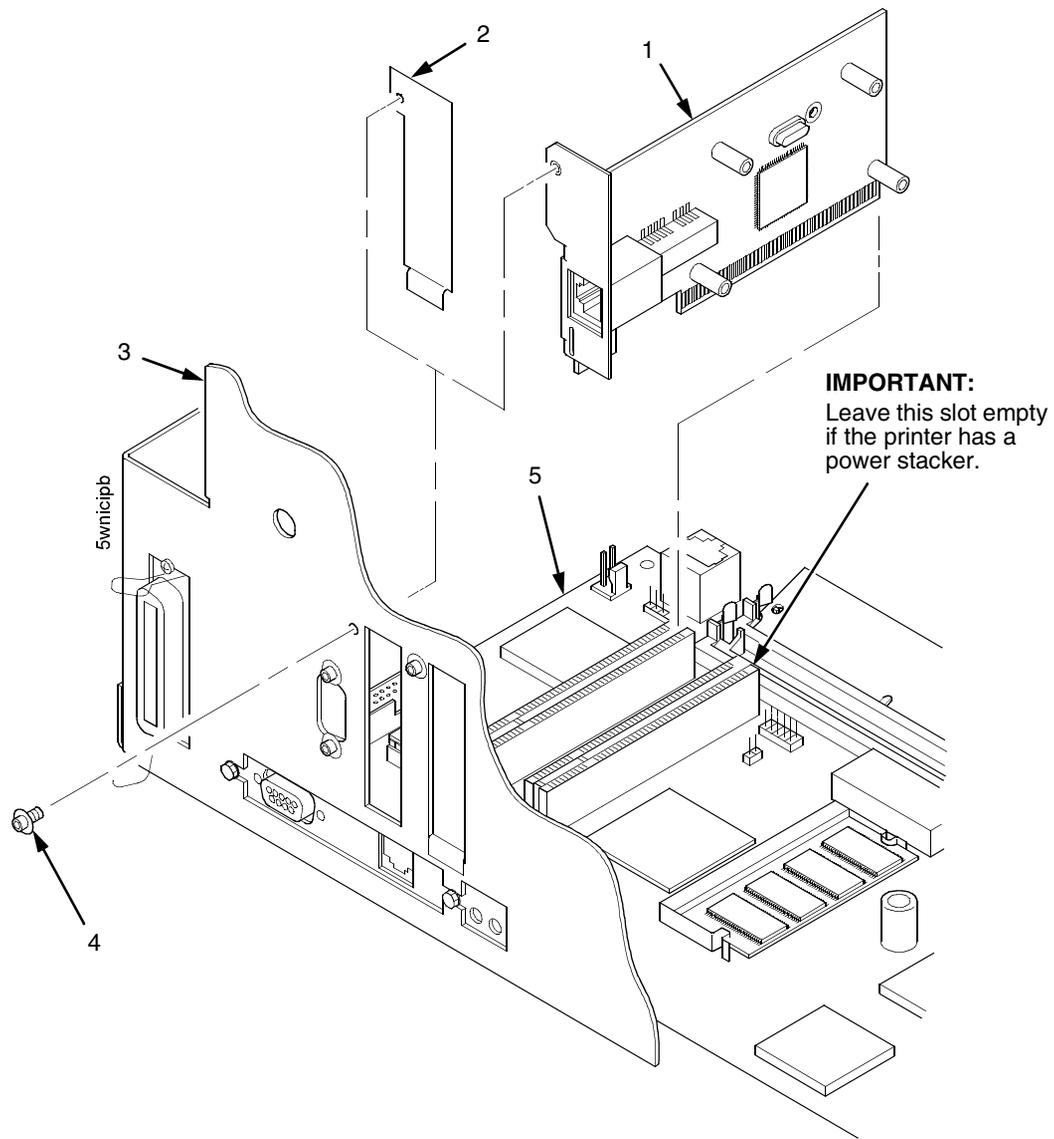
This illustrated parts breakdown shows the ethernet interface assembly.
